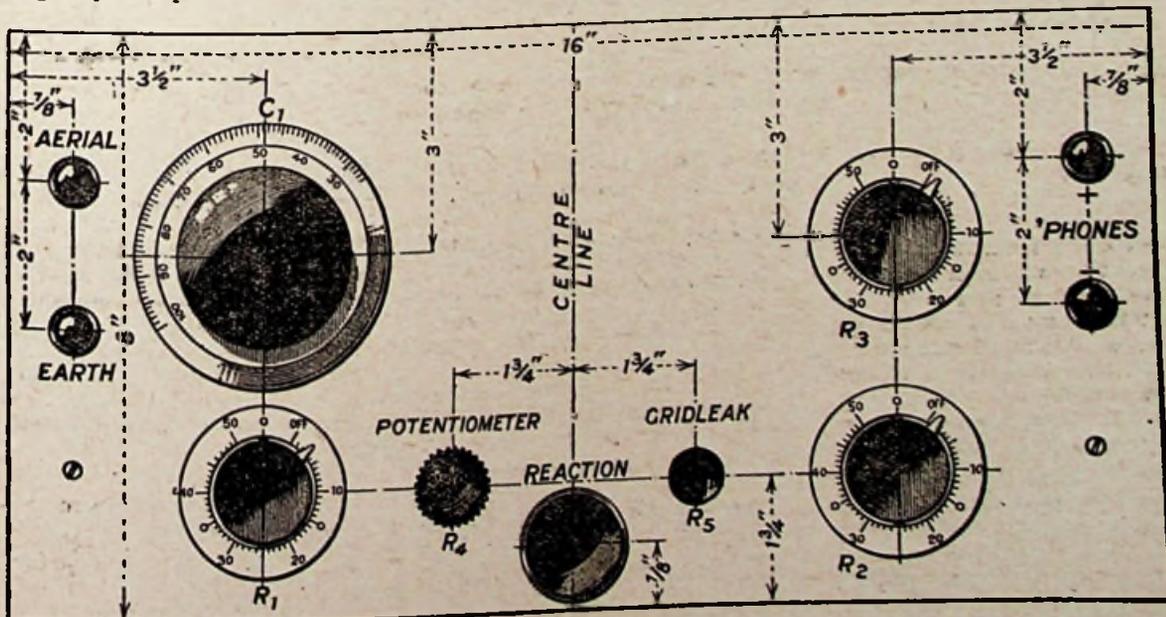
All drilling dimensions are given here. Readers may obtain the full-size blueprint, C1035A.
